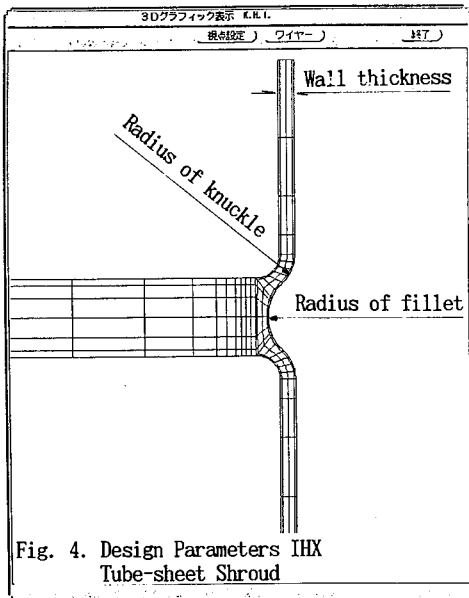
Design Parameters IHX Tube-sheet Shroud
